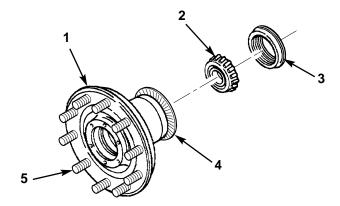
Removing Bearing Seal and Inner Bearing Cone.
